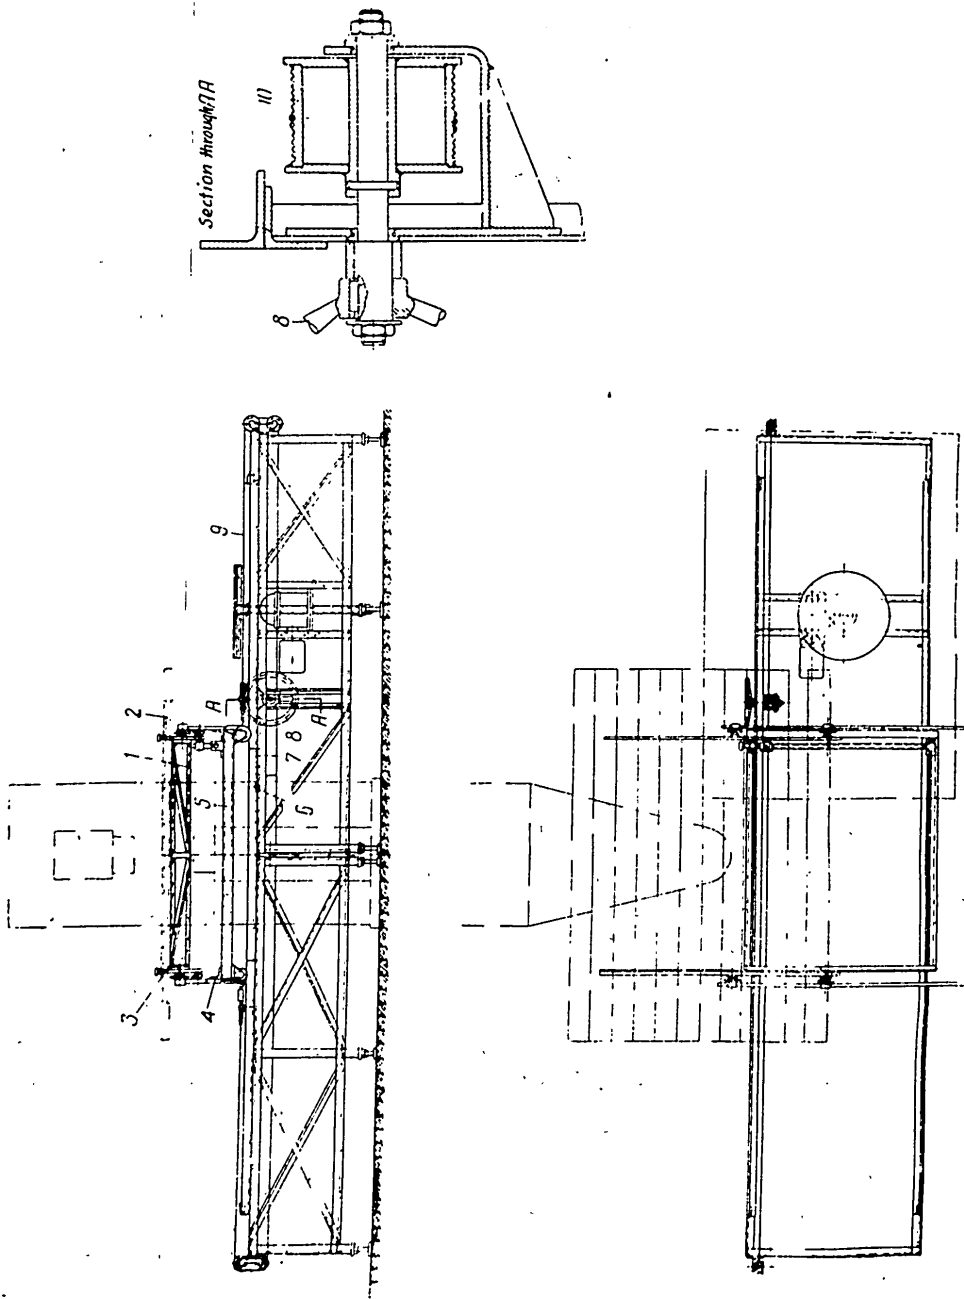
Support and Conveying Equipment for Riveting Large-Size Panels on the Press KP-501A
